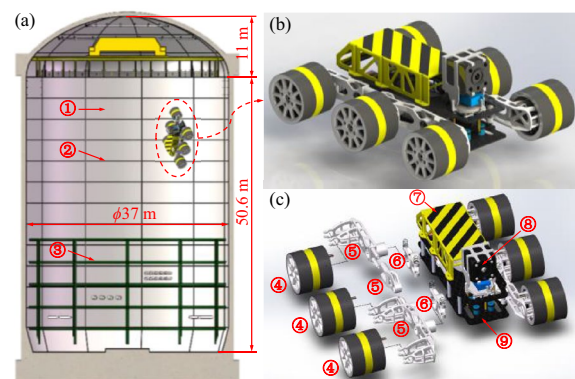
Structures of the nuclear power containment and NuBot. a Nuclear power containment, ① a plate of steel lining, ② weld, ③ support structure; b Axonometric view of the NuBot; c Exploded view of the NuBot, ④ magnetic adhesion wheel, ⑤ suspension, ⑥ support, ⑦ shell, ⑧ camera, ⑨ chassis
